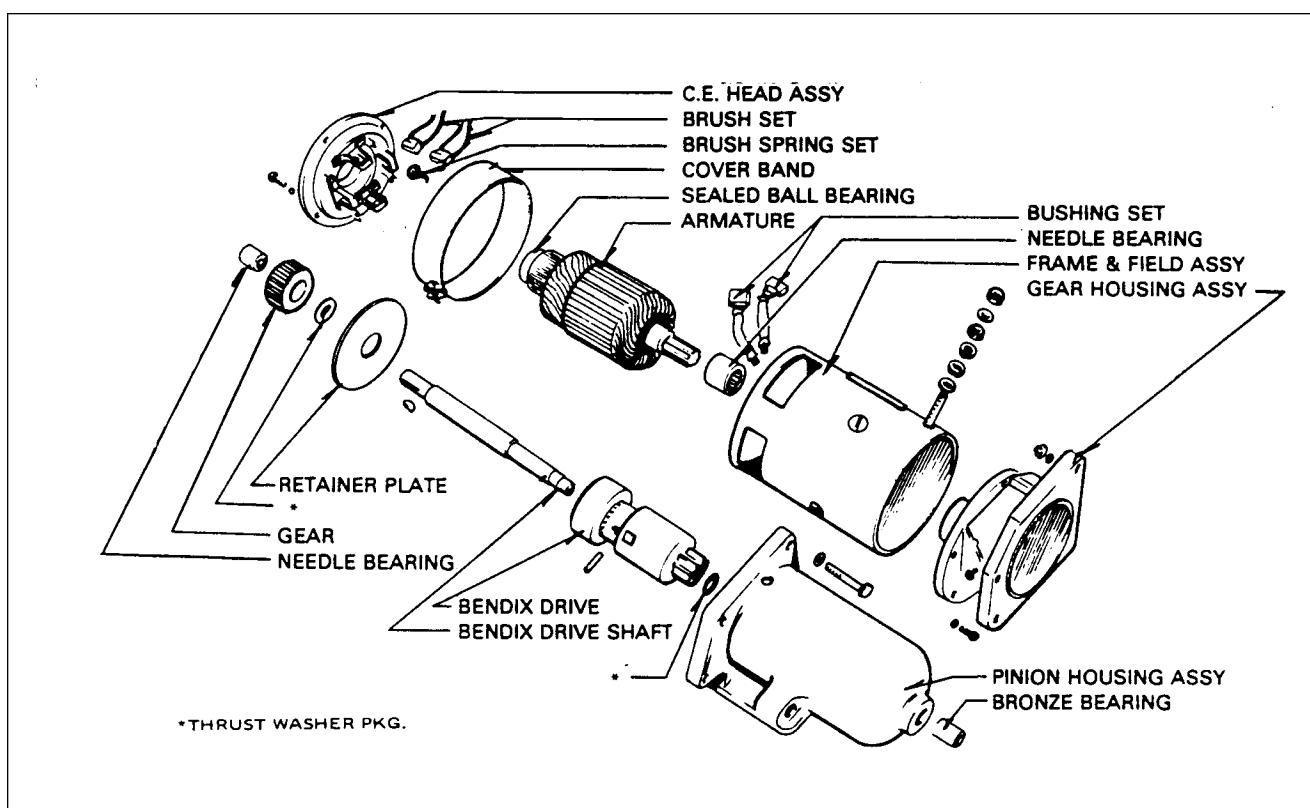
Exploded View of Gear Reduction Starting Motor
